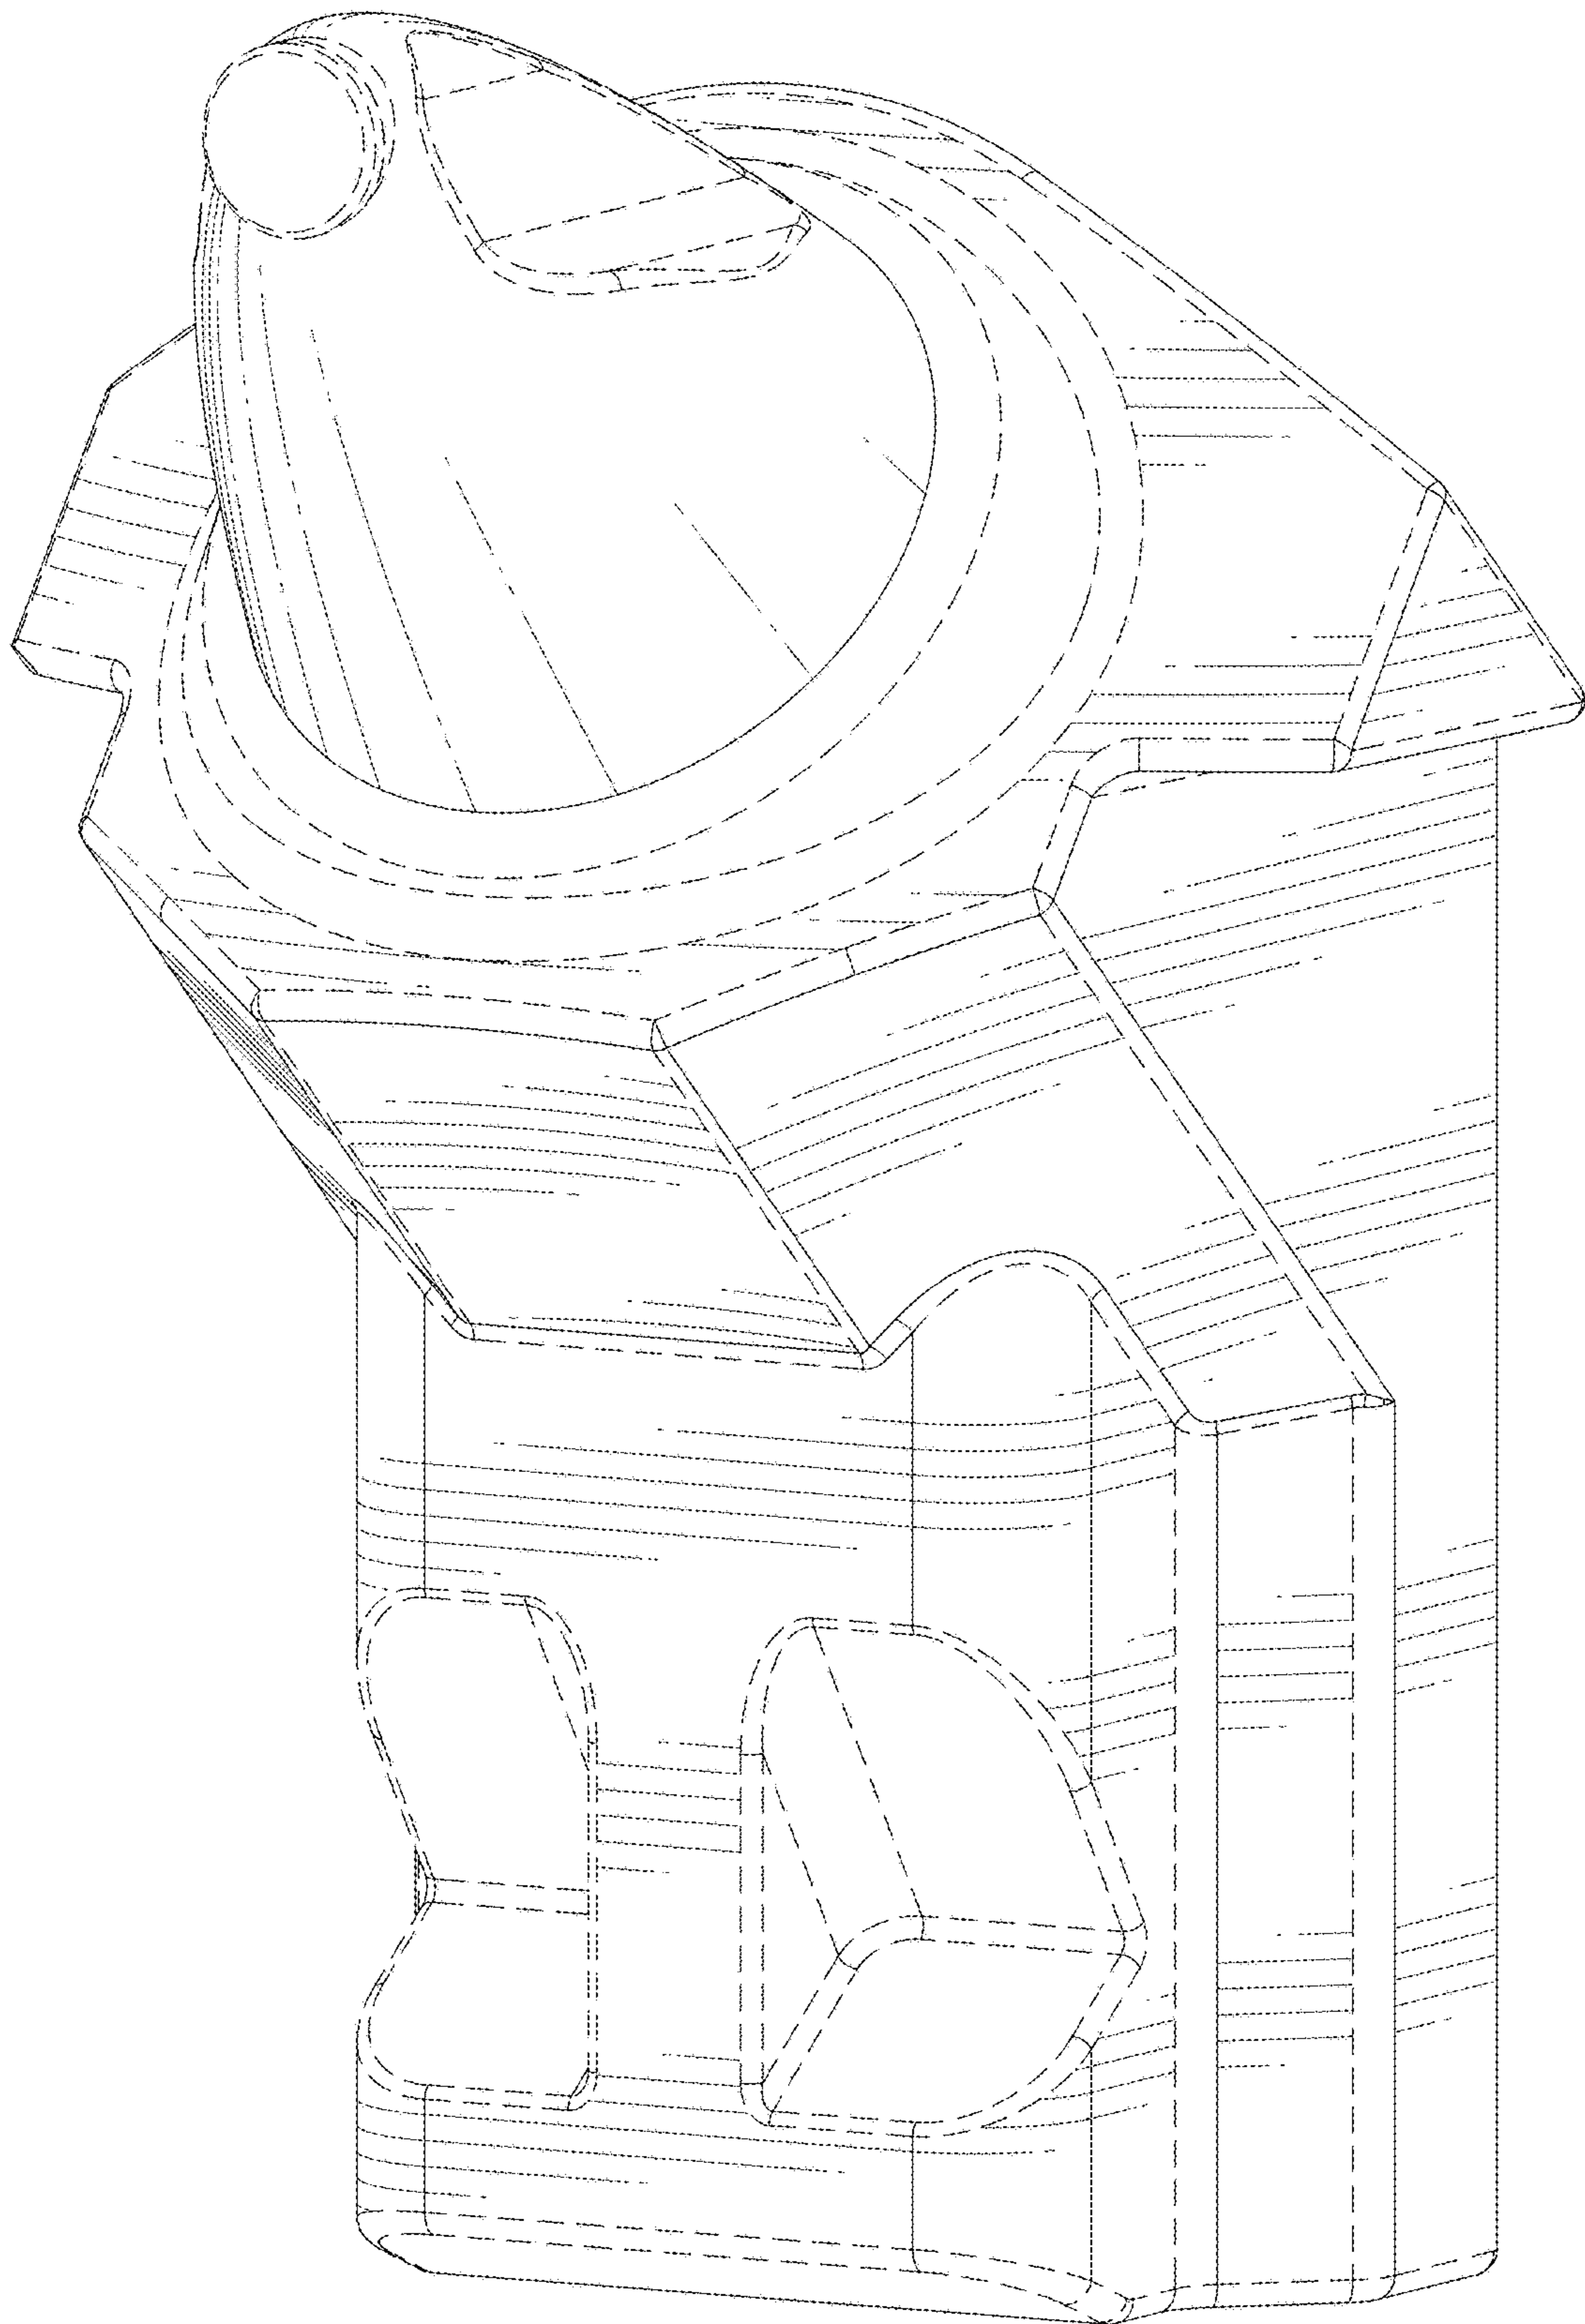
is a front, left, perspective view of the cutting tool assembly secured of FIG. 16 secured in the base body;
